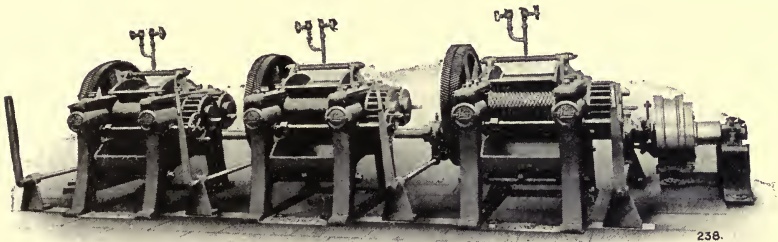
A Battery of Mills, Back-shaft-driven (Shaw & Co.)
